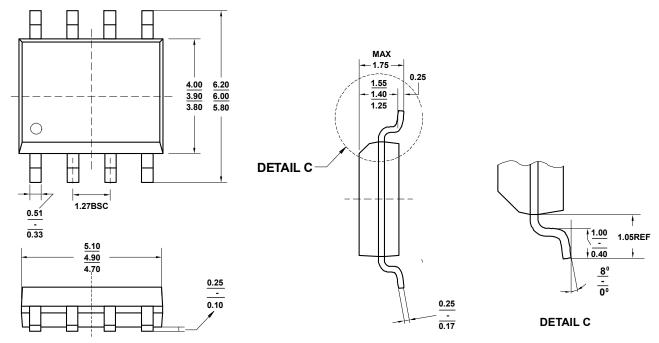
8-Lead SOIC Package Dimensions shown in millimeters
